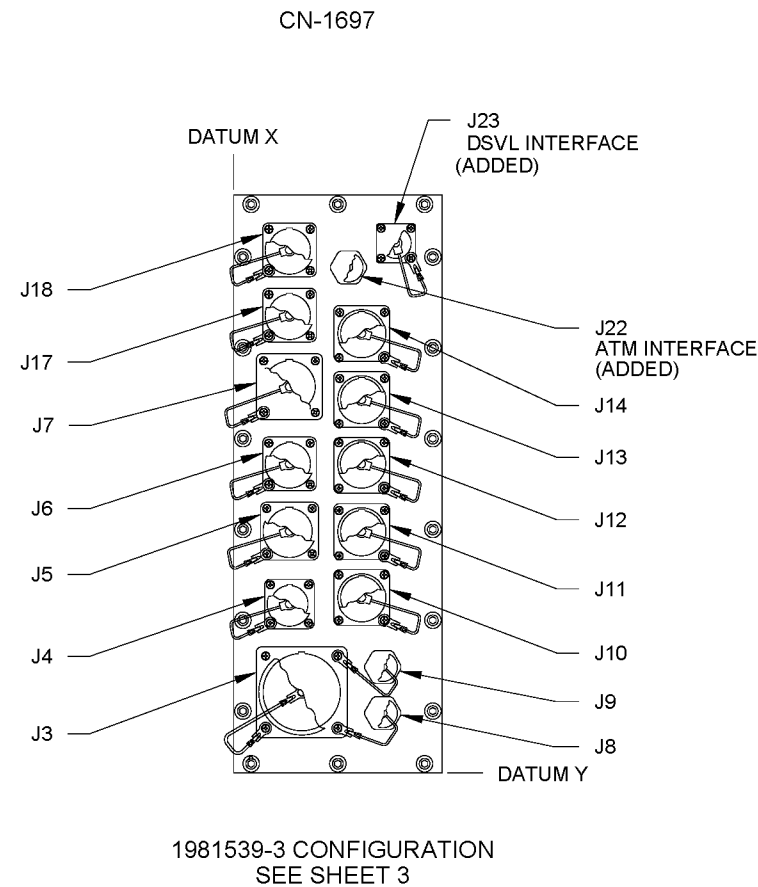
Installation Guidance Mounting Arrangement (Sheet 3 of 6)
